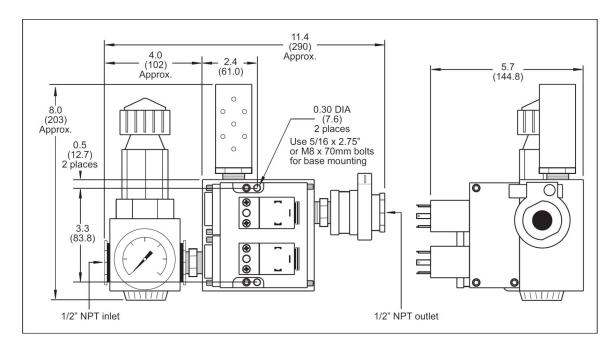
Counterbalance/Cushion Valve Package: Mounting Dimensions
